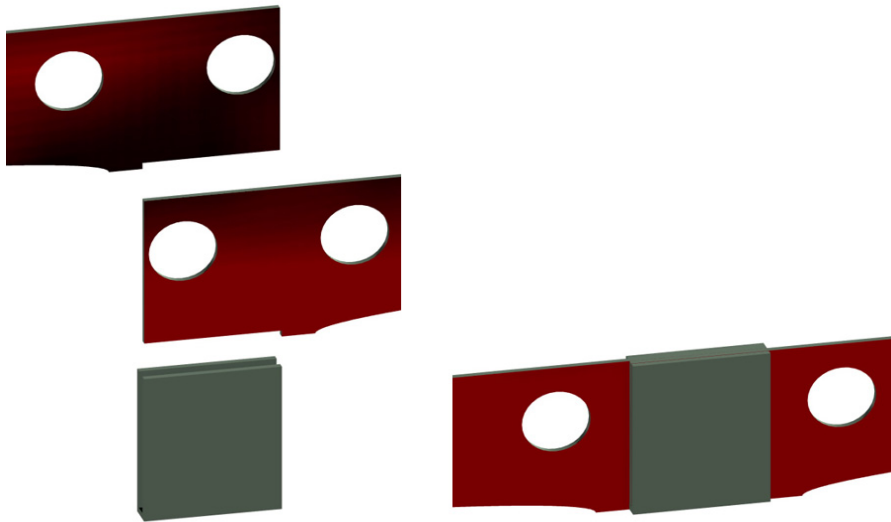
Frame: the larger pieces are divided into smaller components to make them easier to manage. These pieces are assembled using the bracket.
